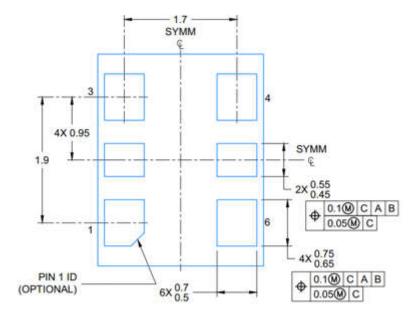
LMK6D/P/H Oscillator in 6-Pin, 3.2-mm × 2.5-mm DLE Package
